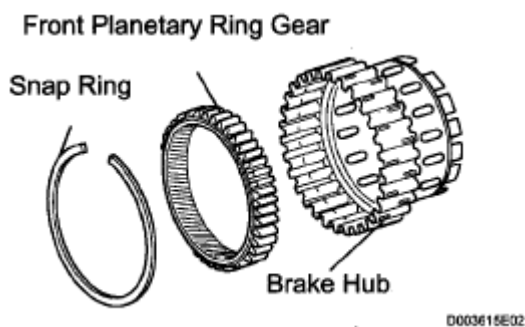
Identifying Snap Ring, Brake Hub And Front Planetary Ring Gear
